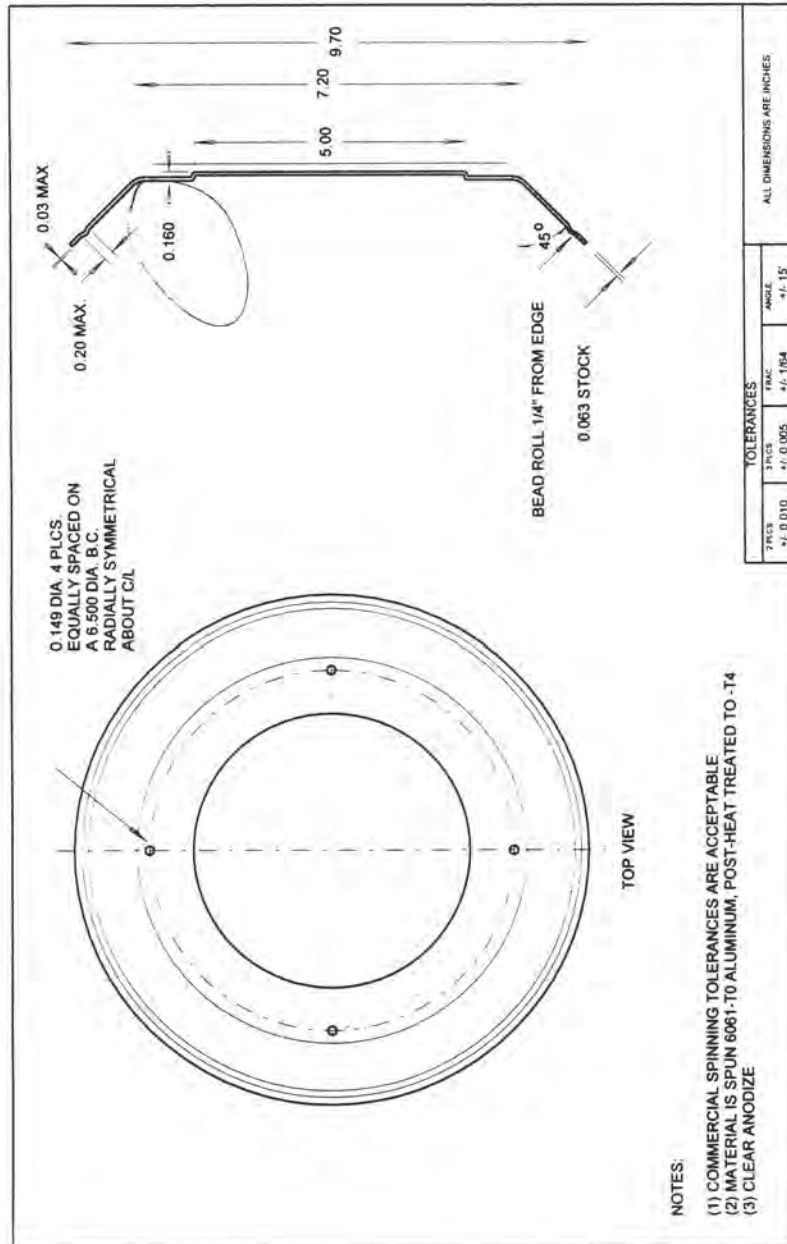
10-MICRON ASSEMBLY, LOWER SECTION
